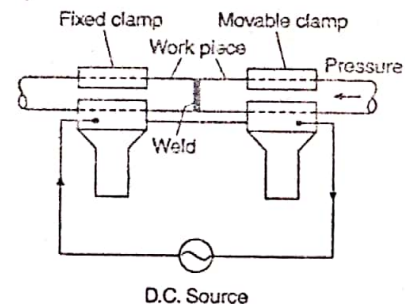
Setup for Resistance Butt Welding
